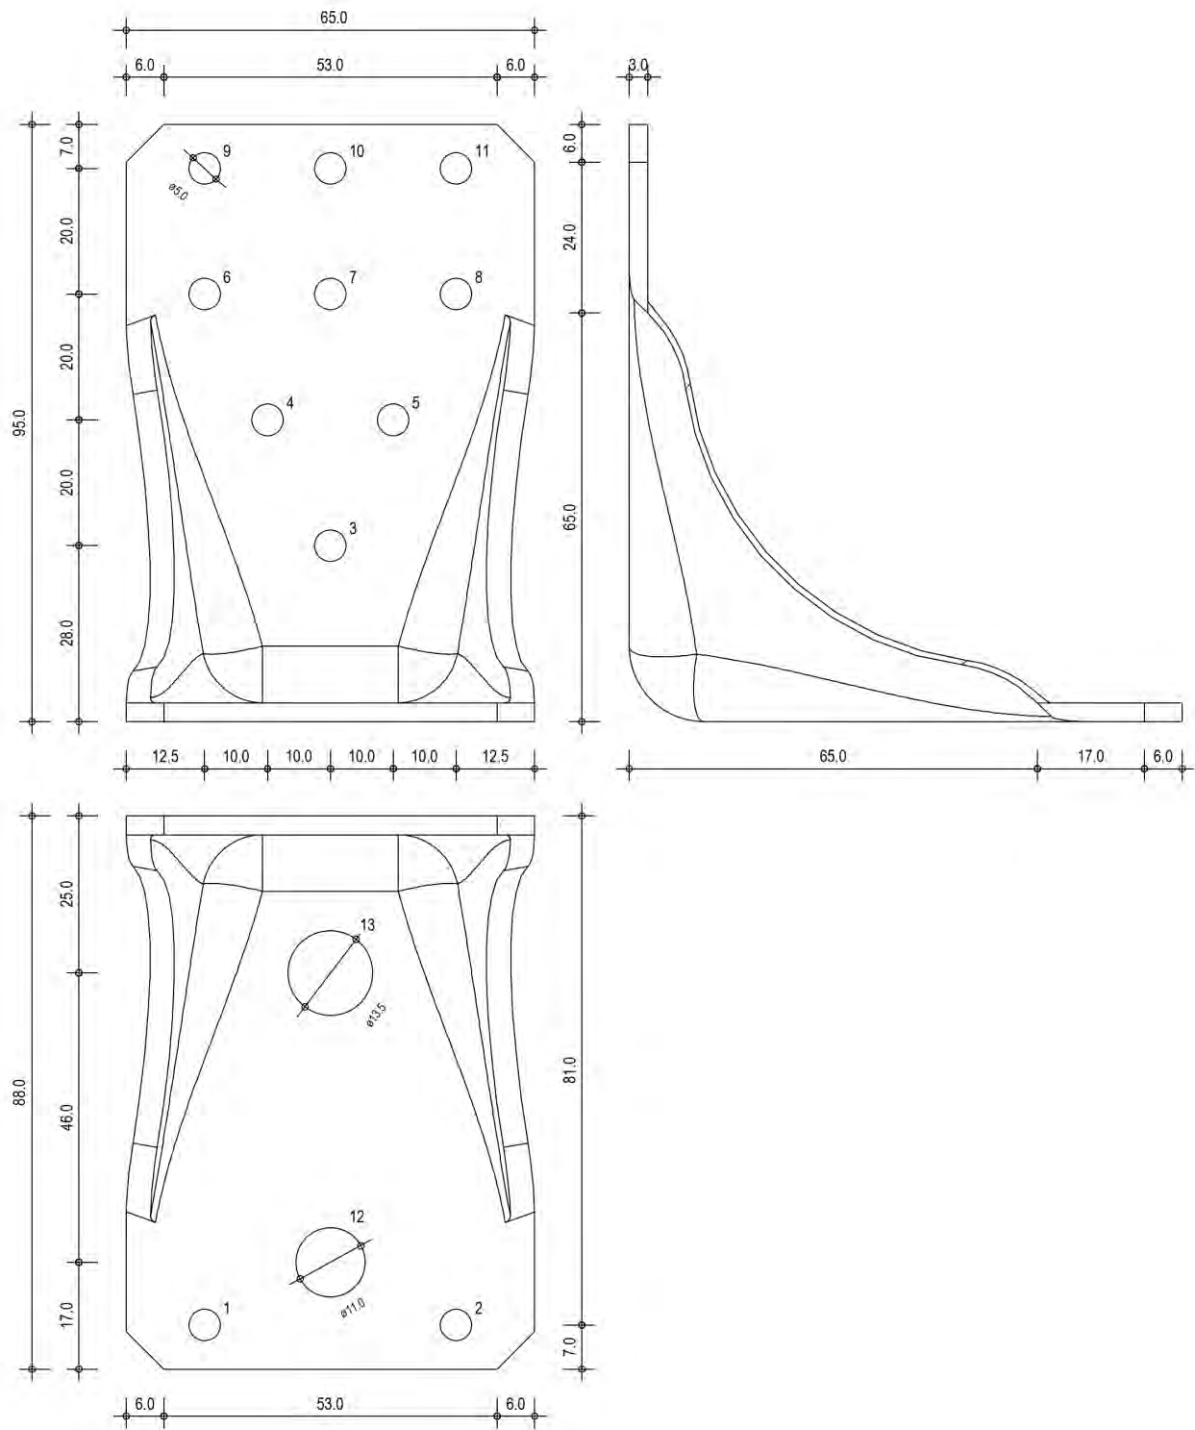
Dimensions of Angle Brackets 1100953L and 1120953L
